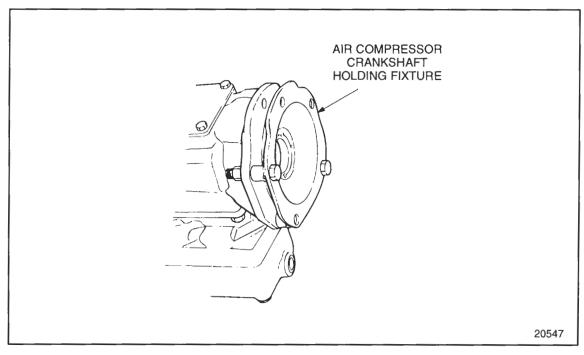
Air Compressor Crankshaft Holding Fixture Installation
